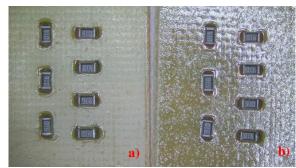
Reflowed test boards - (a) solder paste was deposited by commercial dispenser (b) solder paste was deposited by prototype dispenser
